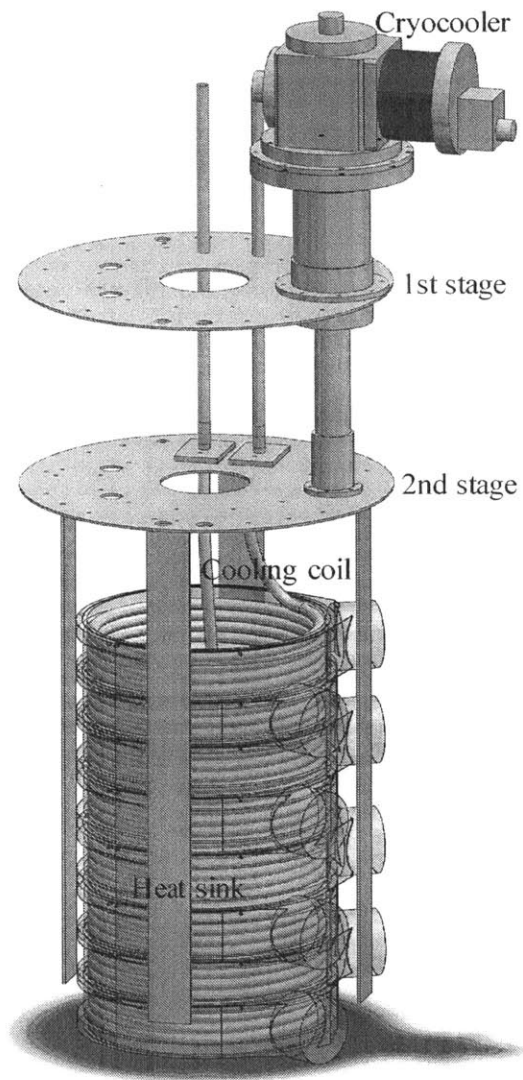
Drawing of cooling subsystem: GM 2-stage cryocooler, cooling coil, and heat sink.
